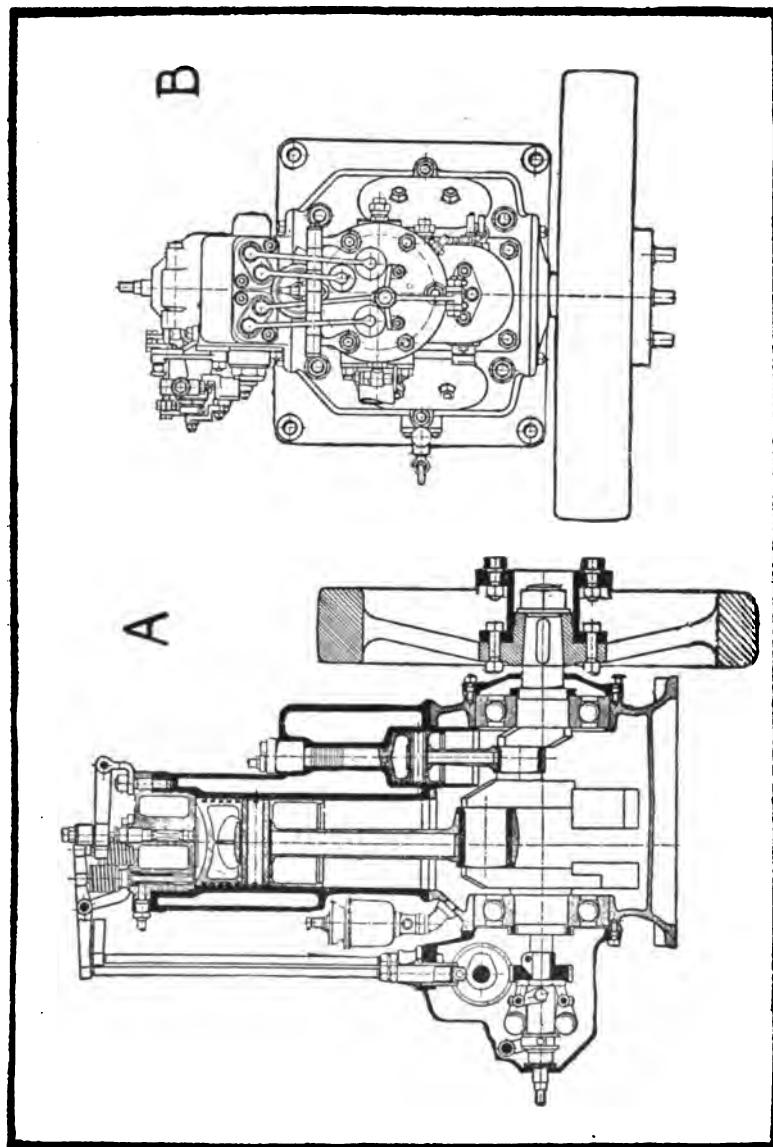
Section of 5 horse-power Diesel motor with ball-bearing crankshaft at A. Plan view of 5 horse-power Diesel engine, showing arrangement of valves in cylinder head and disposition of actuating mechanism.
